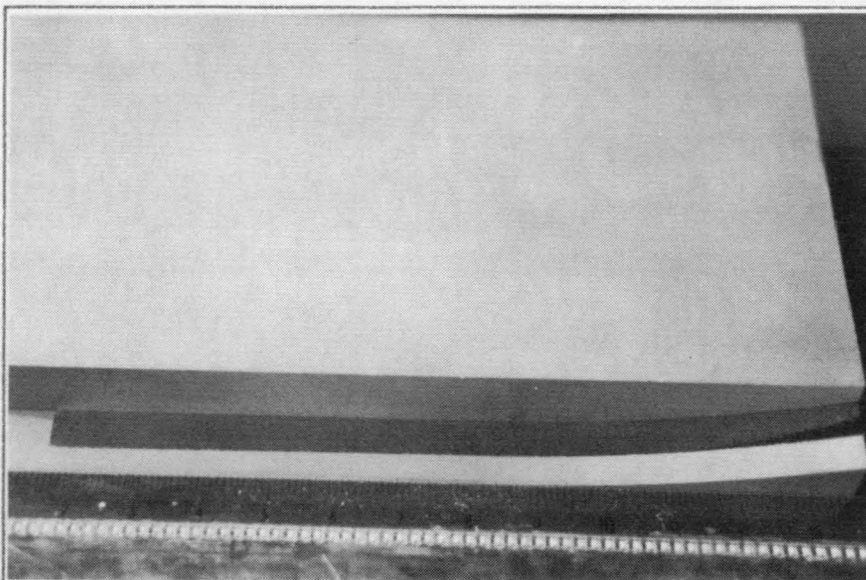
Samples DS1A&B after wirecutting bond plane, MBF20 braze foil between samples
